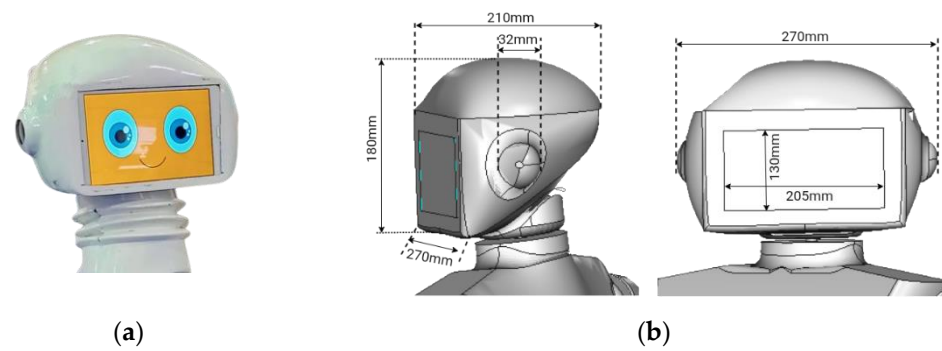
Head of Robo Doc: (a) Physical Design; (b) CAD Design.
